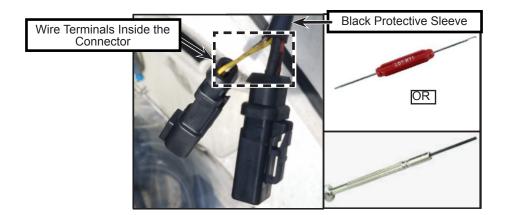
Fan Side Connectors Removal and Tool Options for Terminals Extraction from the Connector Housing
